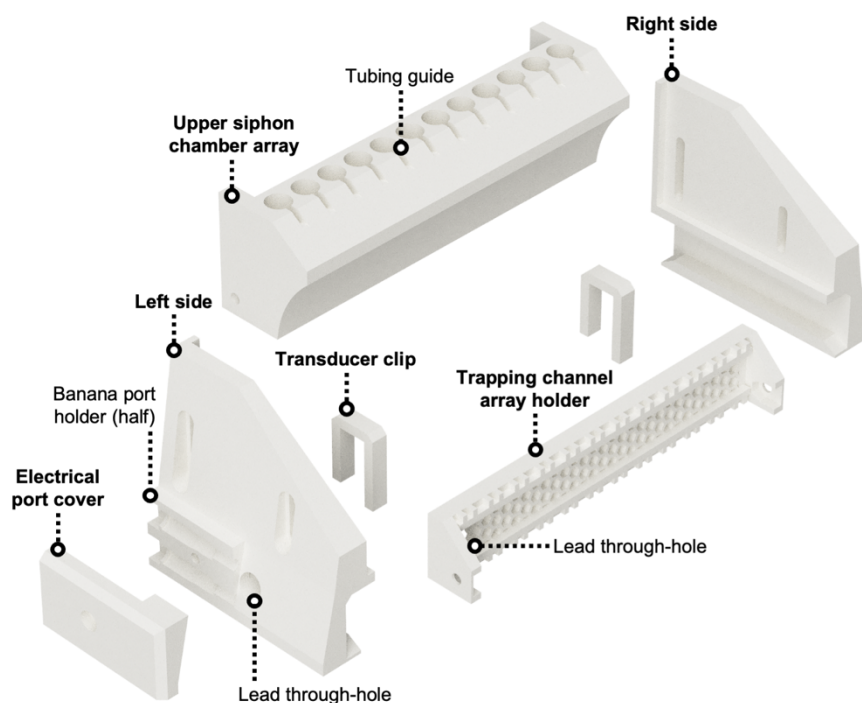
Exploded view of 3D printed multichannel acoustic pipette components. All components were printed via MSLA printing.
